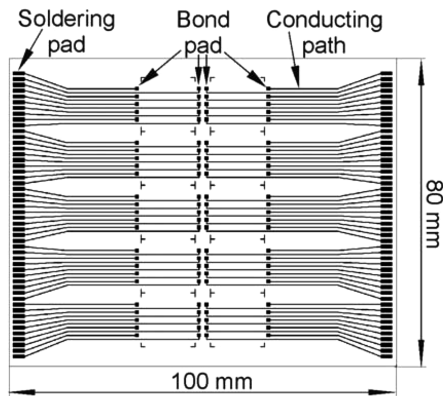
Layout and overall dimensions of flex PCB for hybrid arrays.
